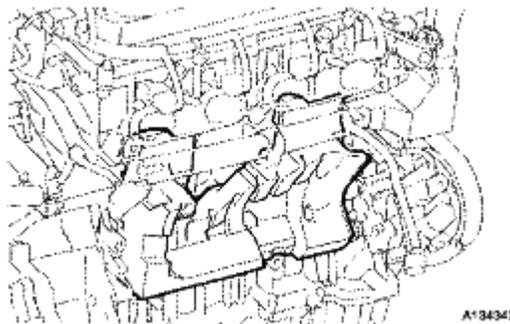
Identifying Intake Manifold Insulator And Cylinder Block
